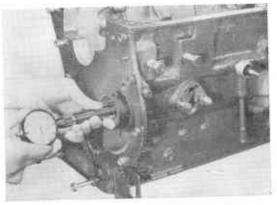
Measuring Camshaft Bearing Bushing Diameter
